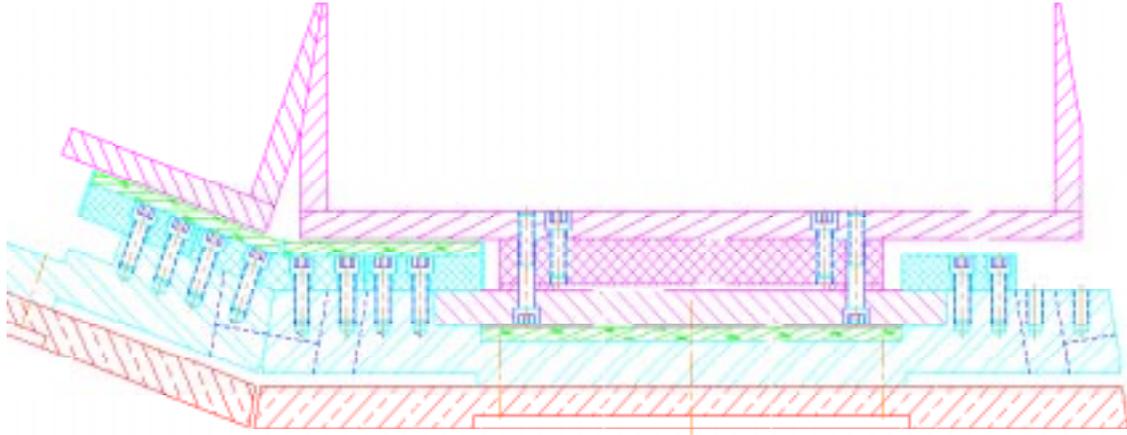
Detail of ECAL attachment to HCAL. Also shown are the scintillators between HCAL and ECAL. Dimensions in mm.
